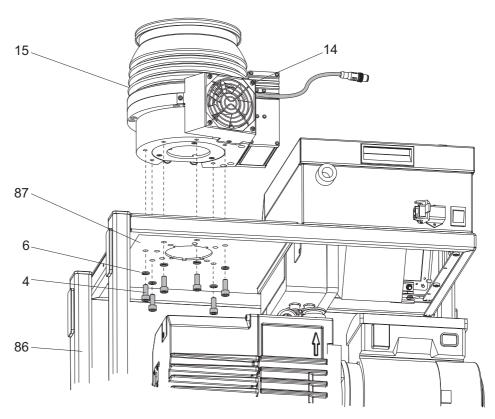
HiCube Pro - turbopump assembly/disassembly
